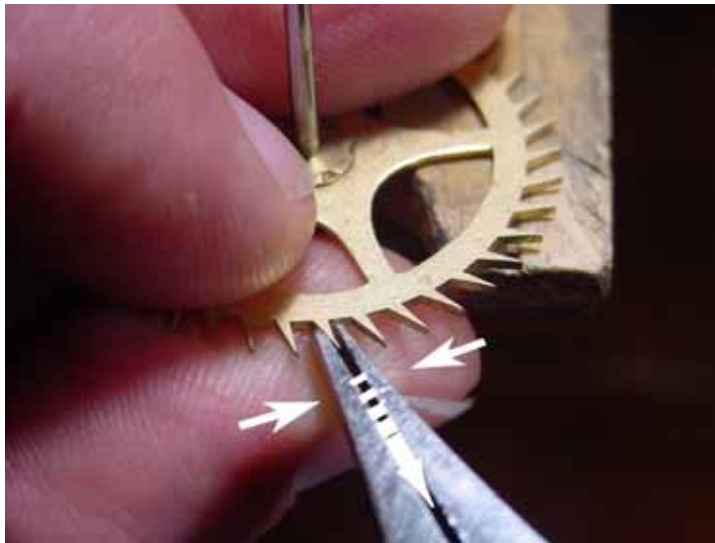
Drawing escape wheel teeth to straighten. Note--The work is being well supported.
